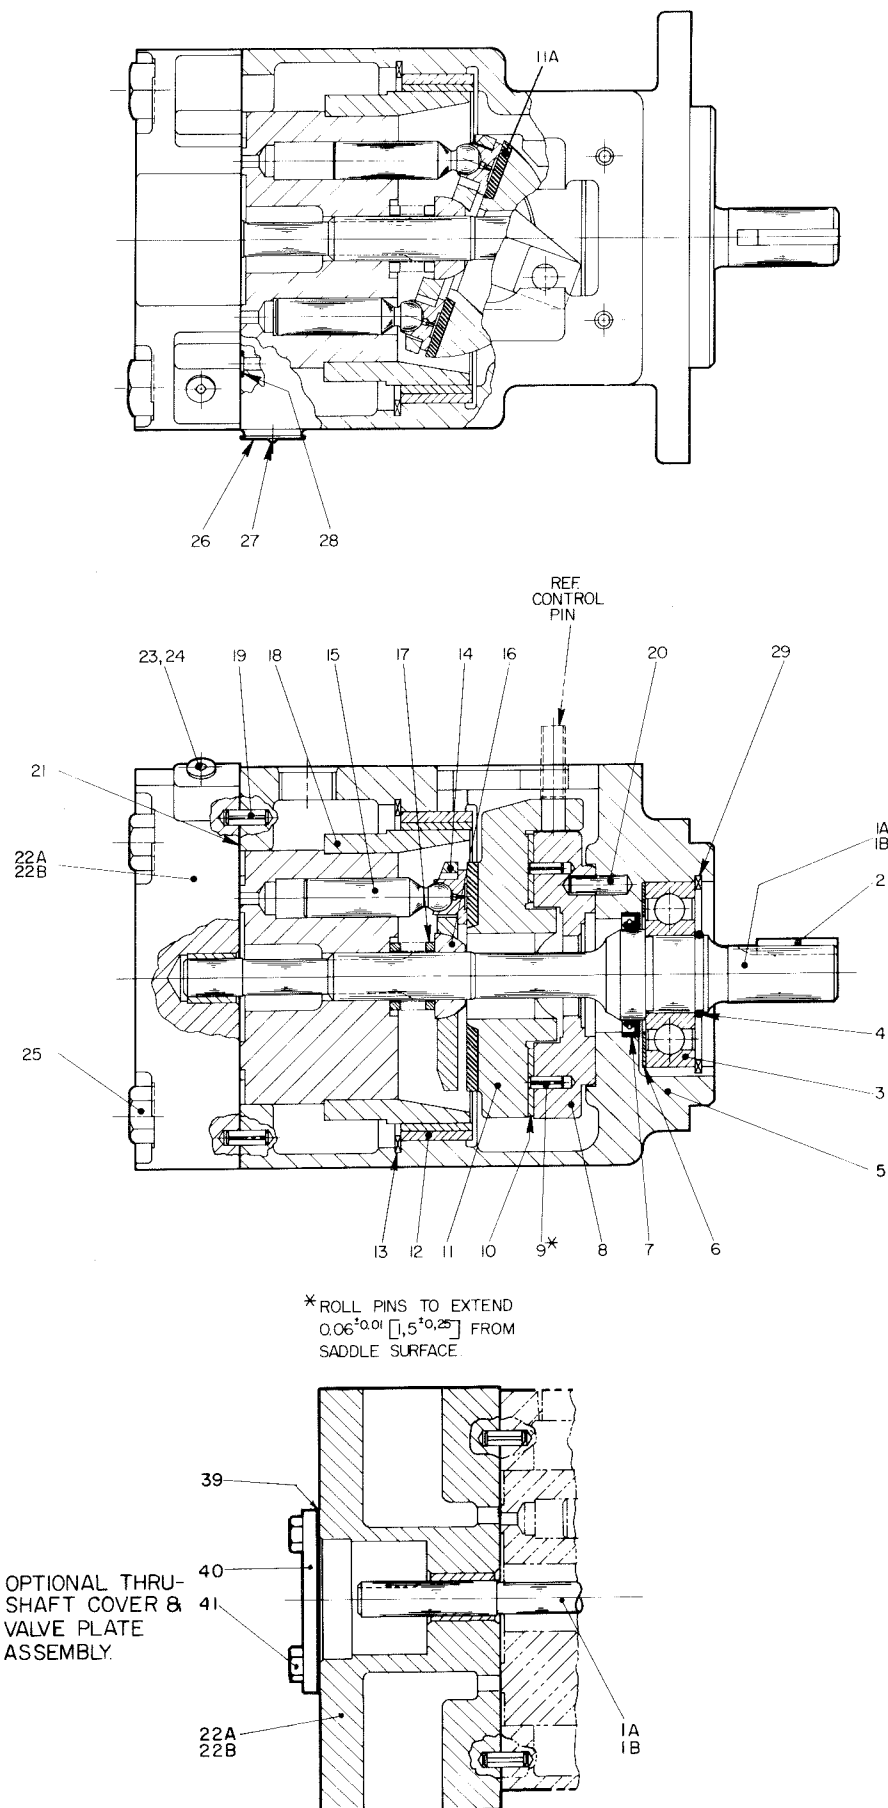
Parts Drawing, "PVW" Pump, Thru-Shaft and Cover Plate Kit. (511783)
